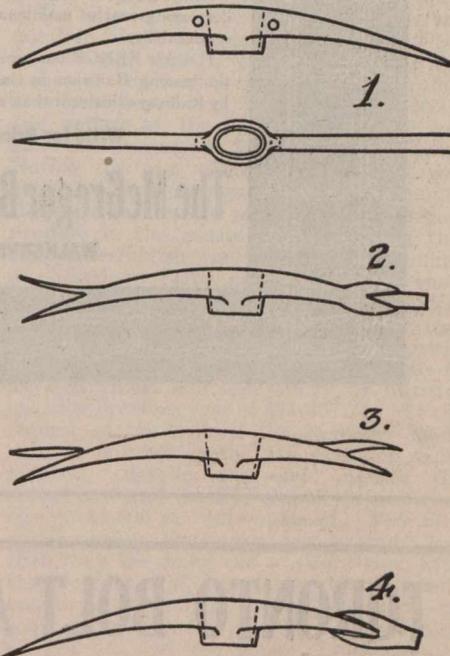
, at the right-hand side, shows one of the usual manners of doing this. The ends of the pick are split open for a little way, to take the point, which is made wedge shape at one end, and the whole welded together and brought to a point, as in fig. 1. But it was noticed that when these same energetic laborers used their picks for levers, they came back to the shop with the points missing, and wide open jaws, as shown to the left of fig. 2.
